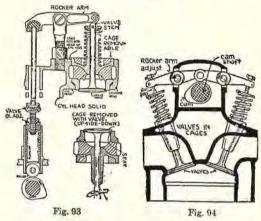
Illustration of solid cylinder head with removable cage, with valves ground in the cage.
